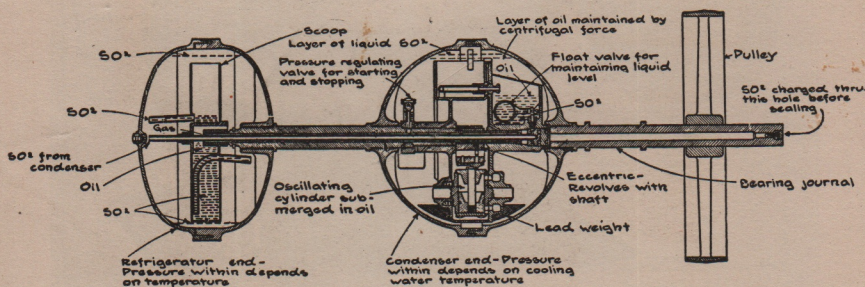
SECTION OF AUDIFFREN REFRIGERATING MACHINE.
